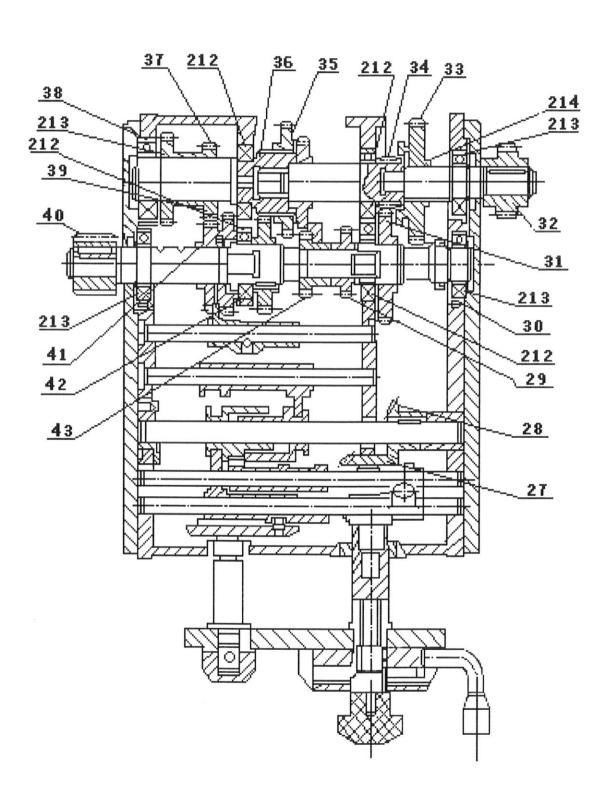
Structure of gear box of milling head of 45° Universal rotary-head of Series X6230
